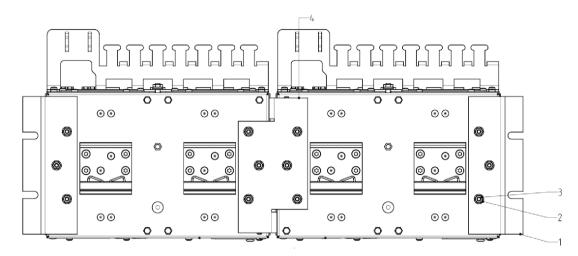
X-300EEC wall mounting (dimensions in mm)
